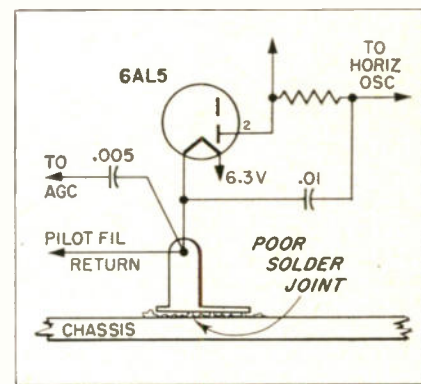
Cold solder joint in horizontal discriminator circuit induced a-c ripple voltage, causing picture bends.
